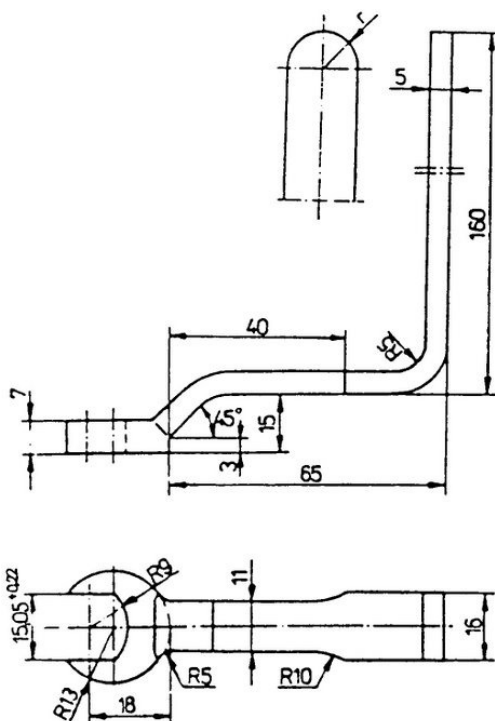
Special wrench RK 15 for valve clearance adjustment
